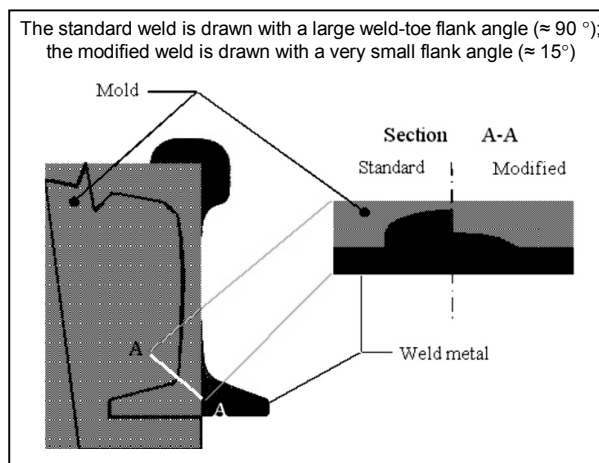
(left) Section through a Rail with Part of a Thermite Welding Mold Mounted; (right) Section into Plane of the Page, through the Weld at the Web-Base Fillet
